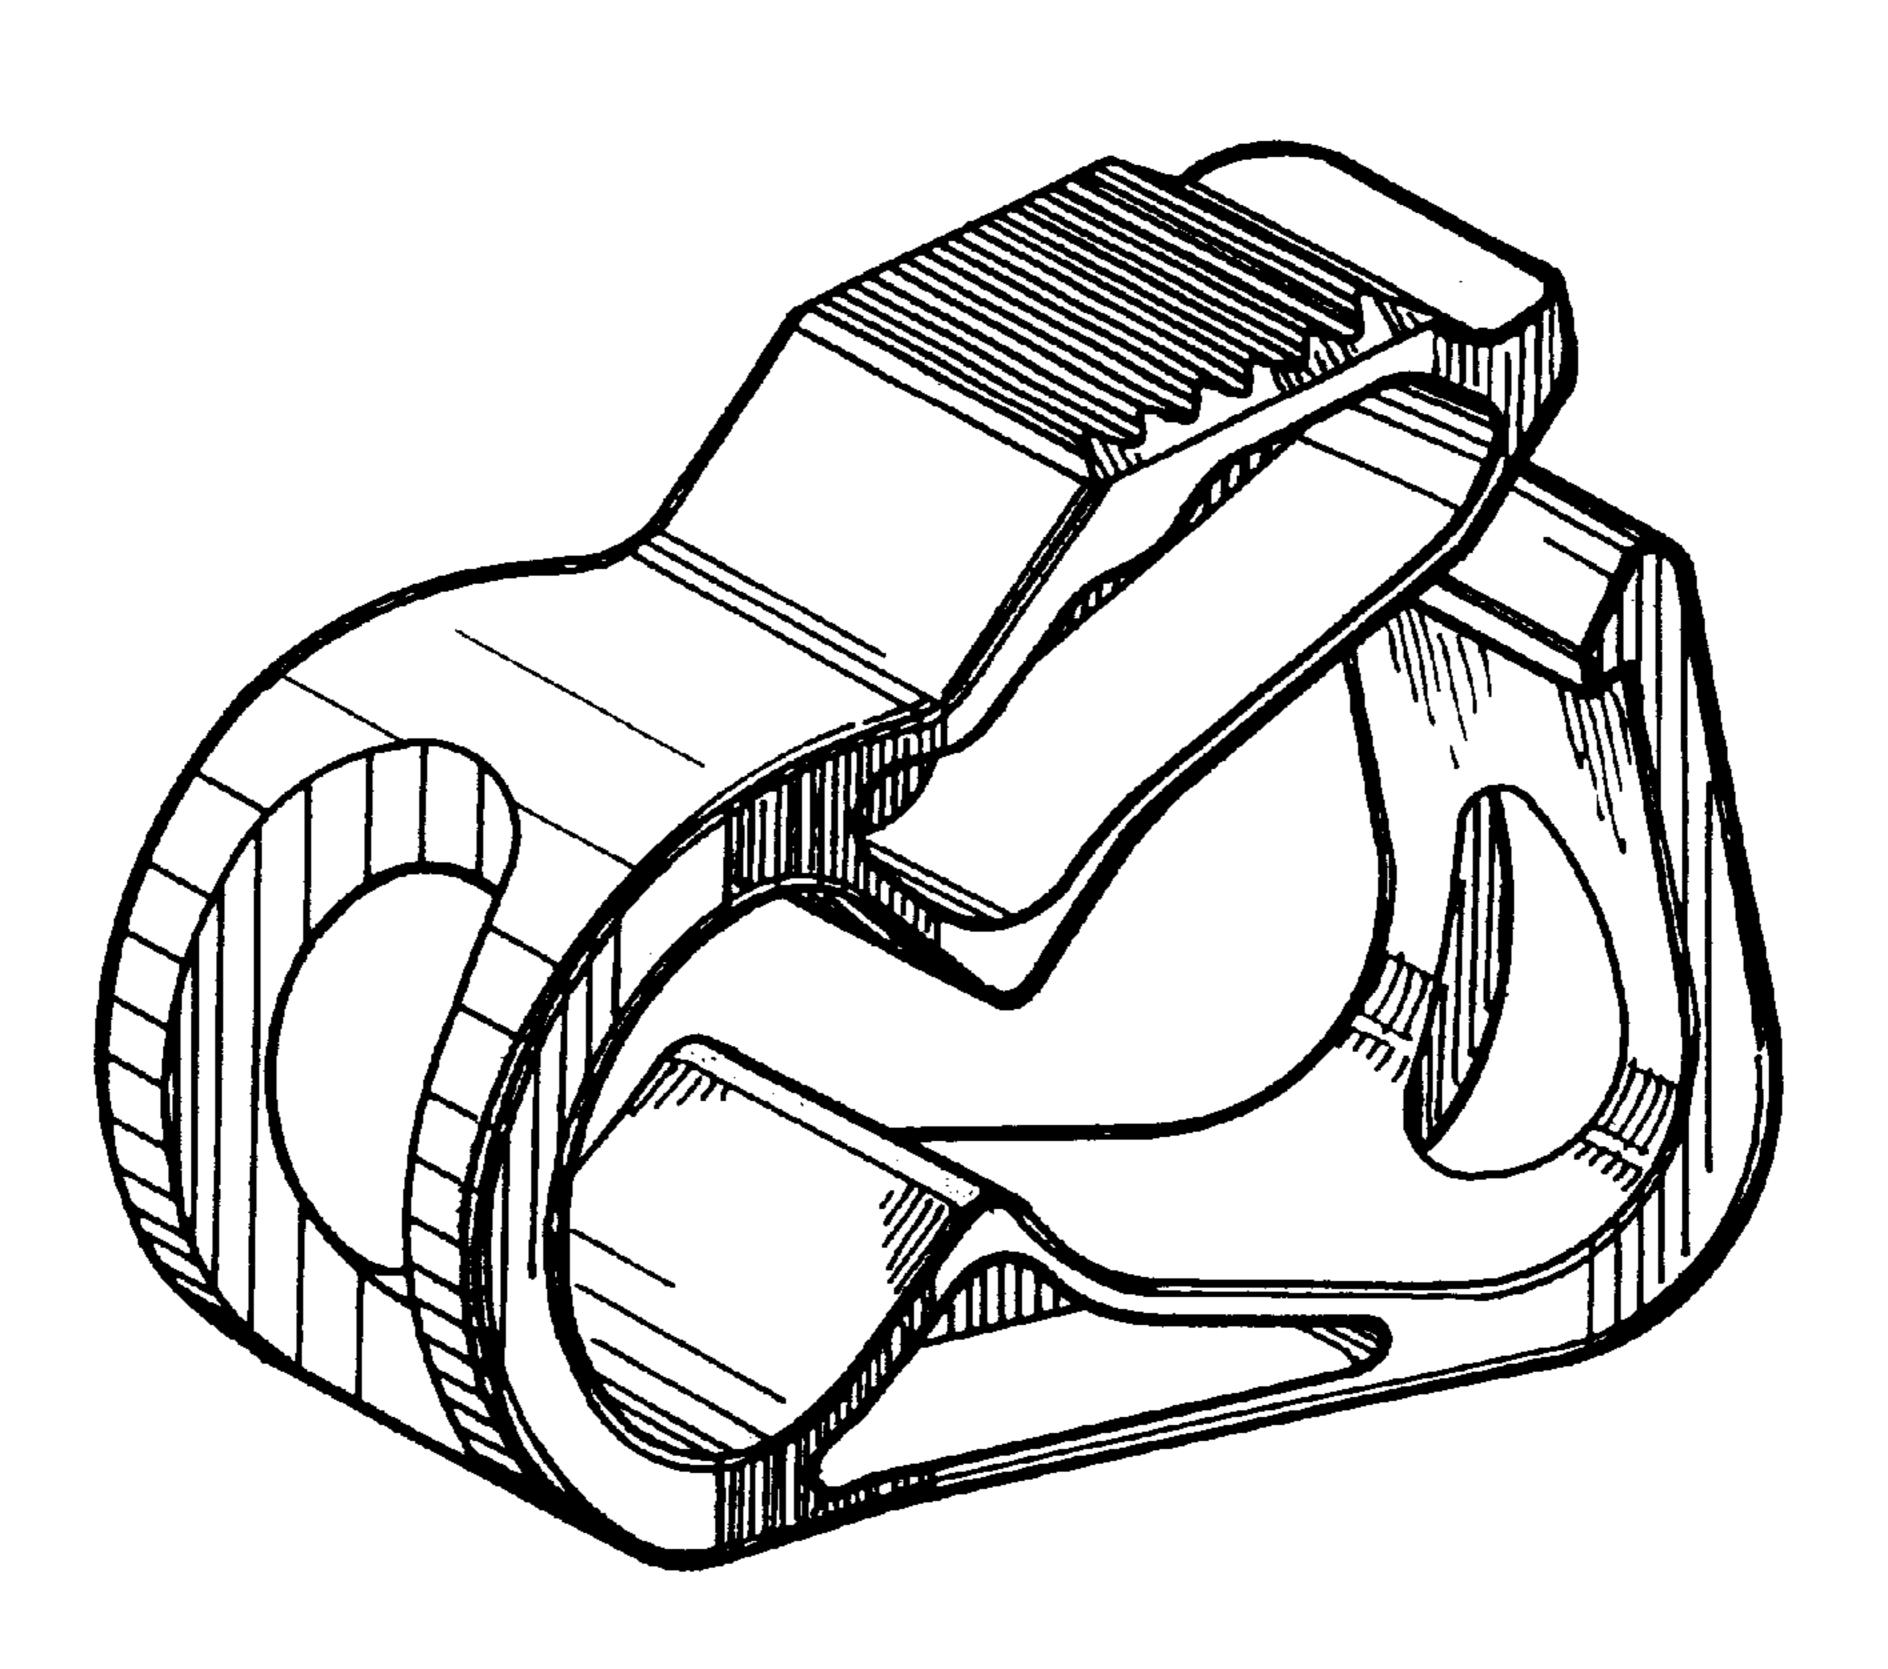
is a perspective view of a clamp for closing flexible hoses of infusion, transfusion medical equipment and shows our design;
